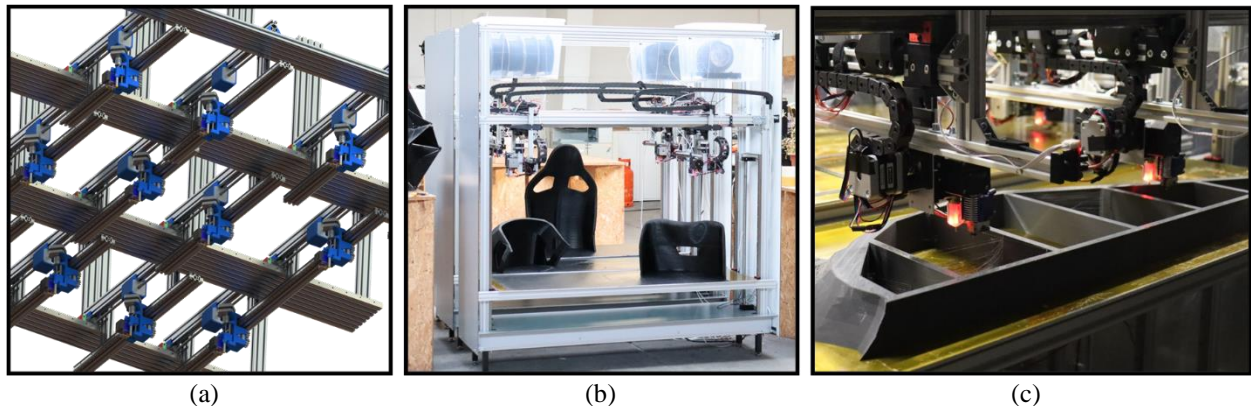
a) CAD rendering of a modular MEFF machine featuring multiple extrusion modules; b) Actual MEFF machine used for specimen production; c) Representative illustration of the MEFF machine producing a large FFF component.
